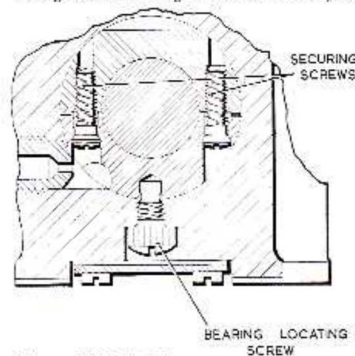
BRASS CENTRE BEARING FOR 8 CYL. PUMP CAMSHAFTS
